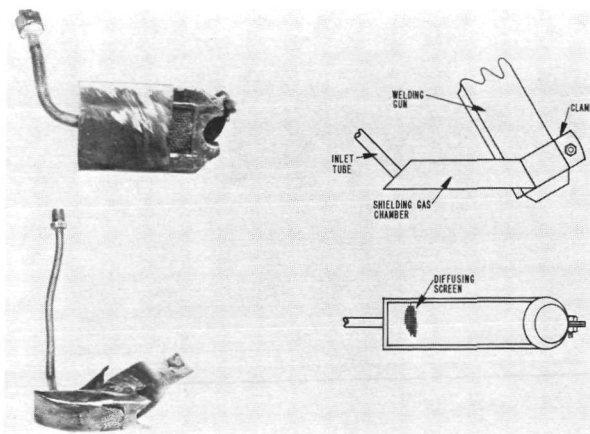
Trailing shields. Top left shows a wide shield for wide joint openings and capping passes; bottom left shows a narrow shield for narrow joint openings and root passes. Sketches at the right show trailing-shield attachments to a welding torch.
